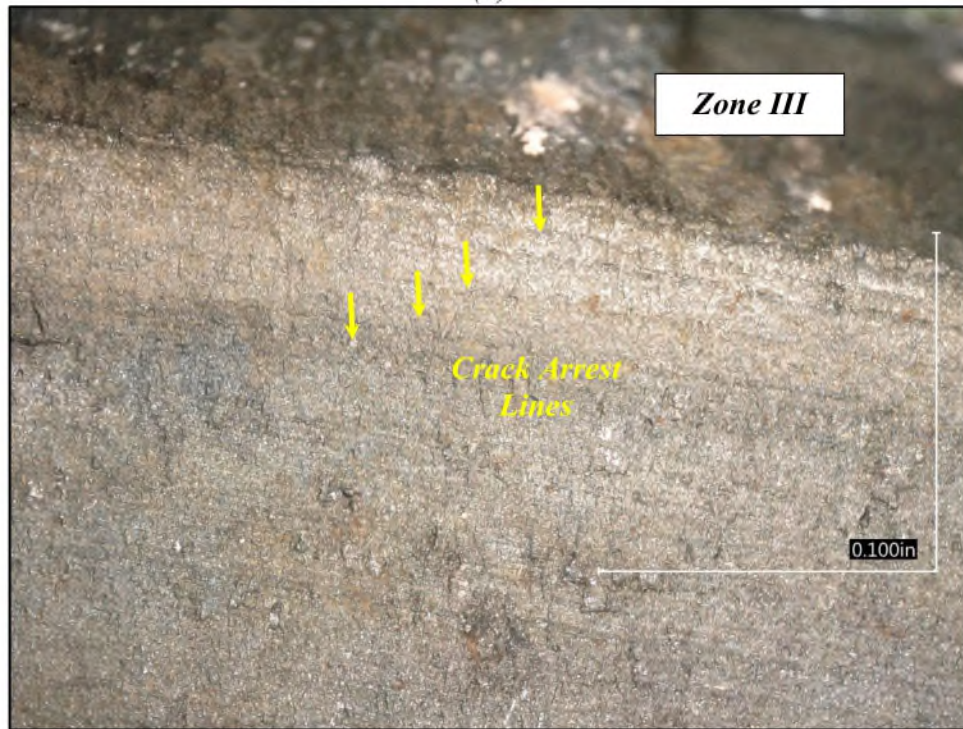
Overall view of the section of the seam-side crack surface encompassing the fatigue crack.
